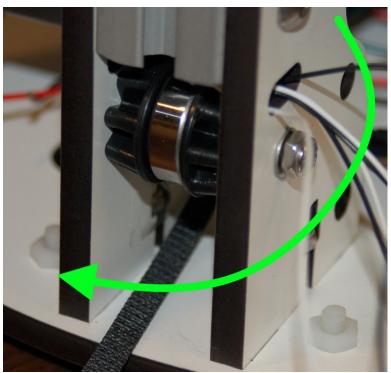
3: Around the gear and under the idler...to Grandmother's house we go... Now thread the belt through tower hole in the base plate.
